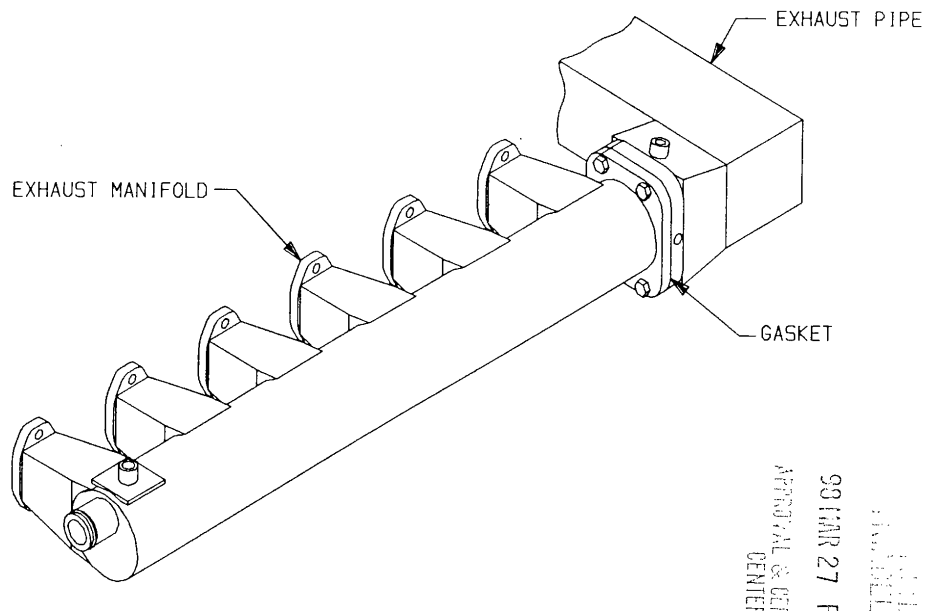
Gasket Between Exhaust Pipe and Exhaust Manifold Flange
